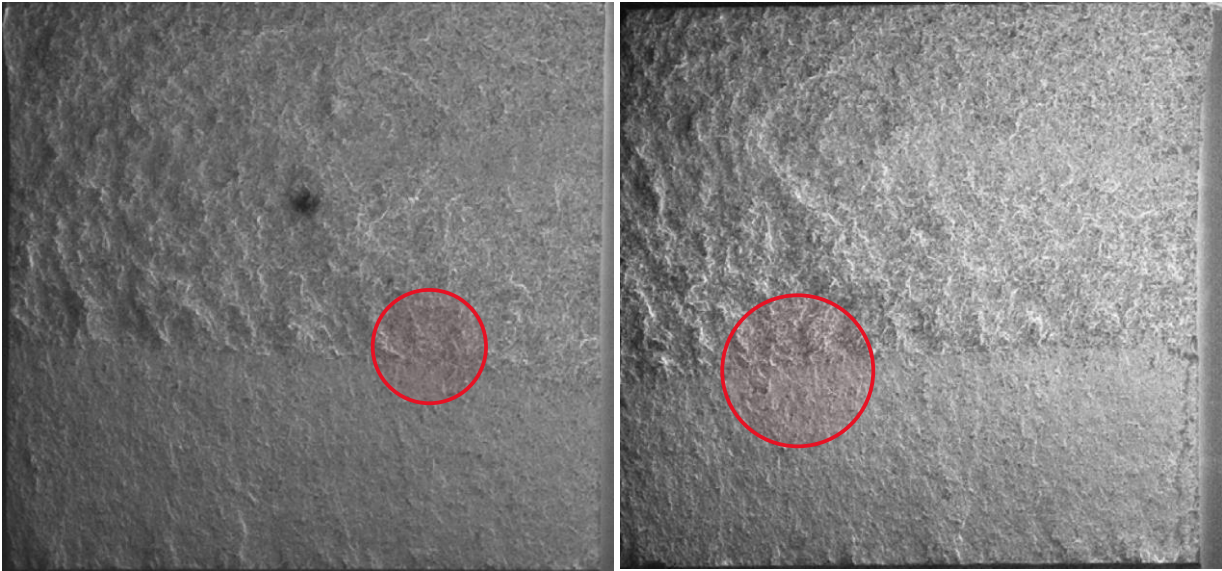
Left and right fracture surface of irradiated SE(B) specimen C8B, manufactured from a WOL specimen, showing cleavage fracture. The specimen was tested at 15°C and the fracture toughness was $K_{Jc} = 48 \text{ MPa}\sqrt{\text{m}}$. The primary cleavage fracture initiation region is marked by a red circle. The cleavage fracture region is quite flat, which limits the amount of shear fracture between n different fracture planes. The fatigue surface contains patches of intergranular fracture, but intergranular fracture is not visible in the cleavage fracture region. Fatigue crack growth is controlled by a strain accumulation mechanism, and this makes fatigue crack growth more sensitive to grain boundary fracture. Cleavage initiation occurs in a region without special features.
